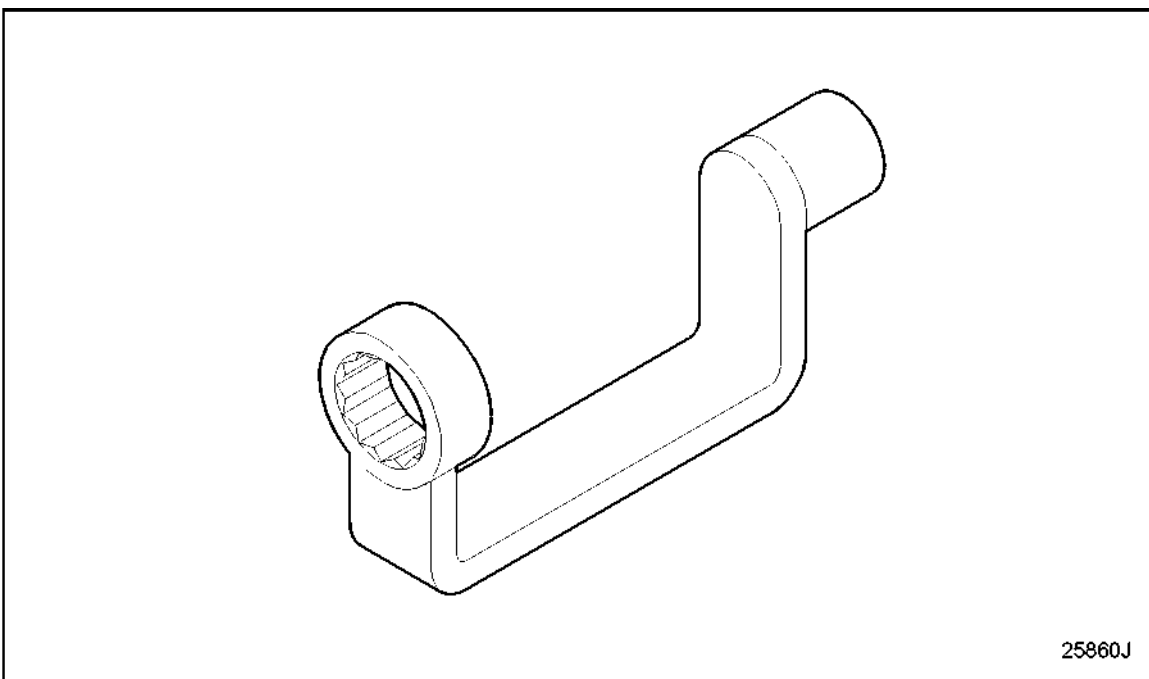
Head Bolt Wrench (15/16"X1/2"Drive), J 1928-02
